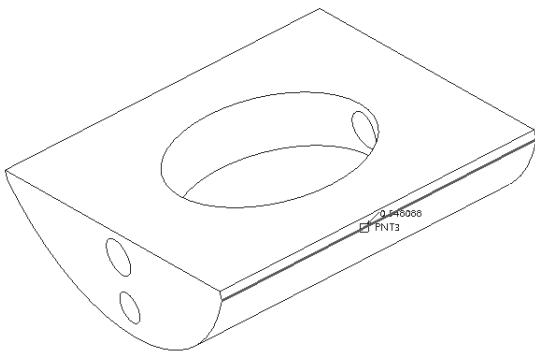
The highlighted edge and the datum point at some offset distance from one end of edge
